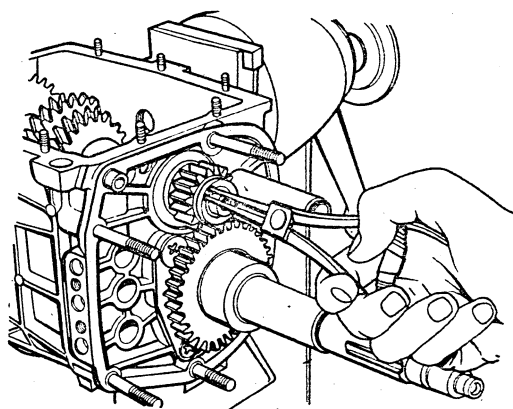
Removing the Reverse Speed Gear Locking Ring from Countershaft
